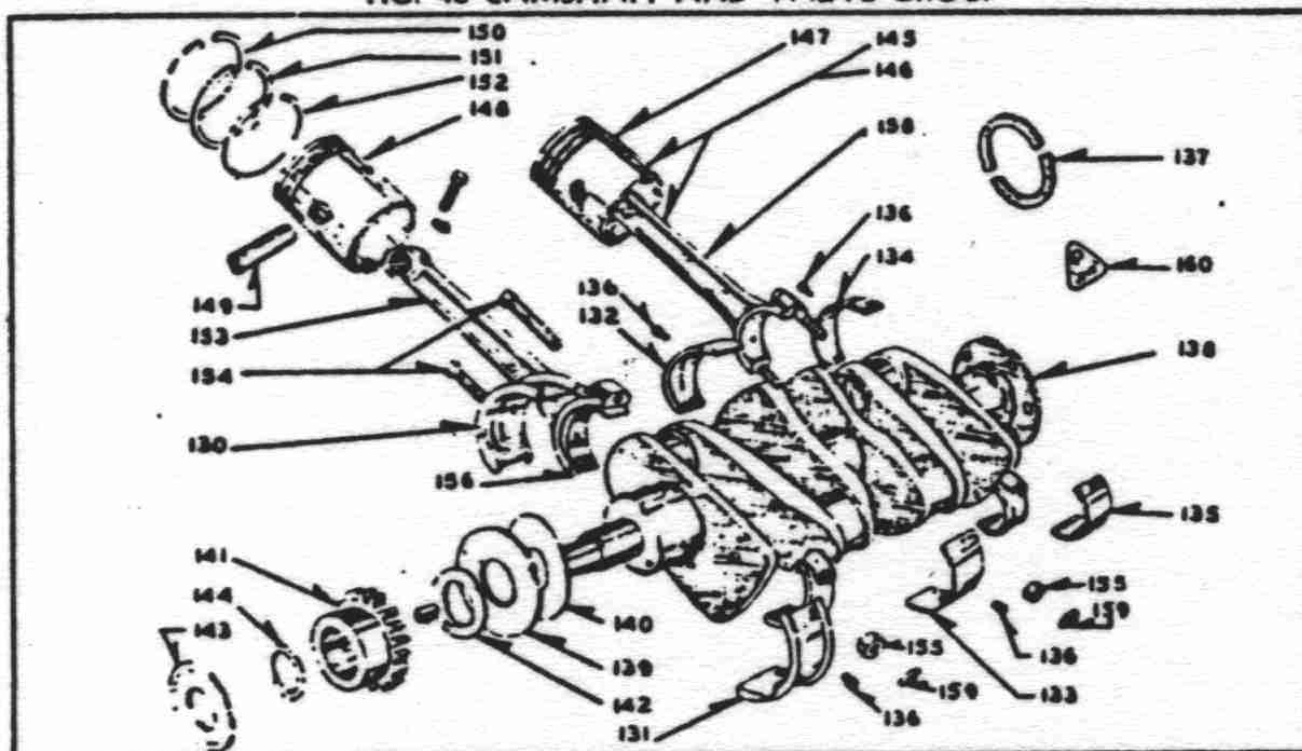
CRANKSHAFT AND CONNECTING ROD GROUP
